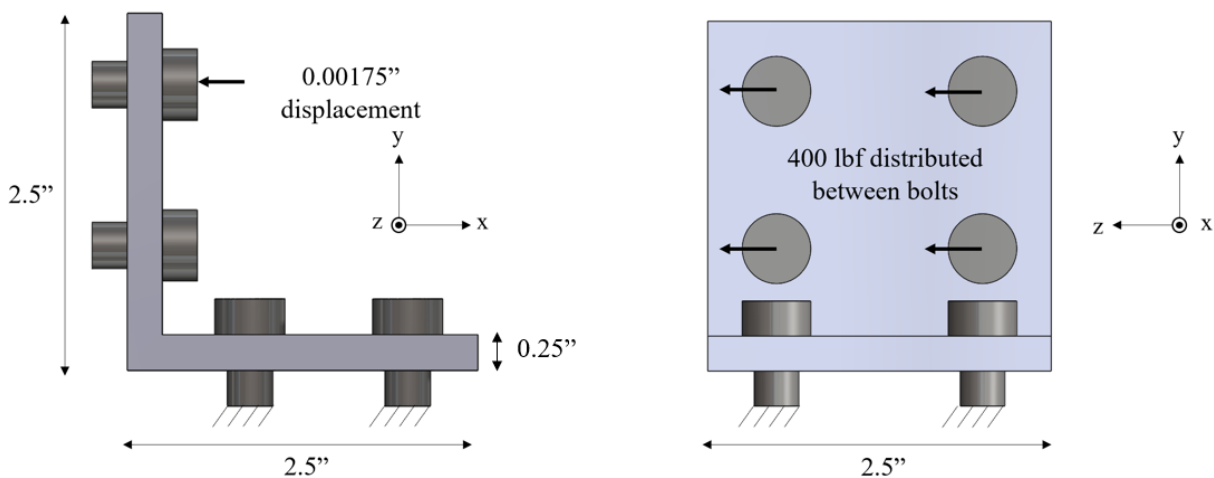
Dimensions and Loads of the Aluminum 6061-T6 Bracket
